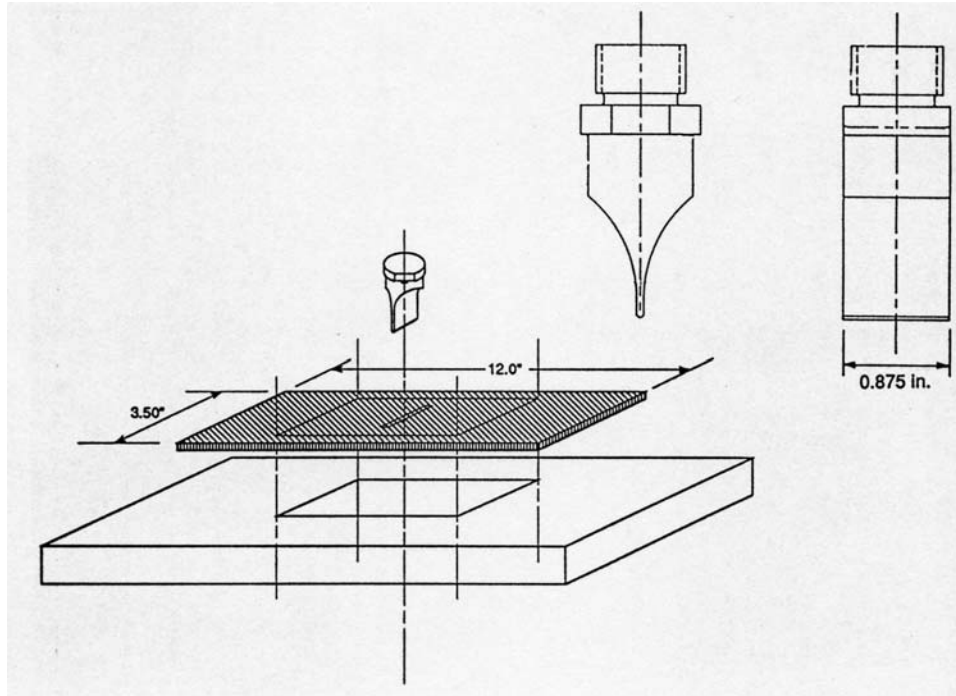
(a) Penetrating impact support fixture.
